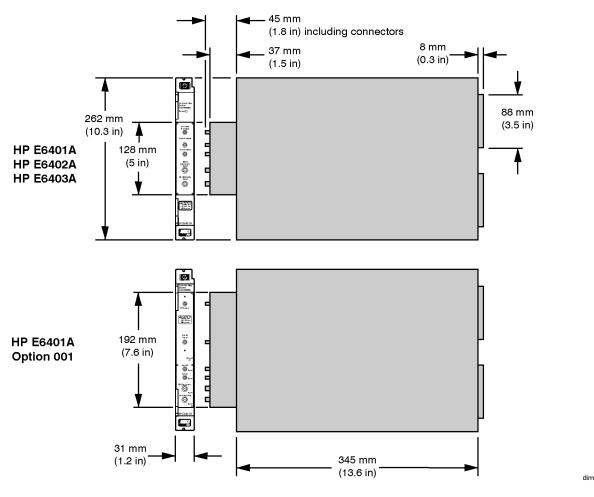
Dimensions of the HP E640xA Modules Comprising the HP E6500A VXI Tuner System
